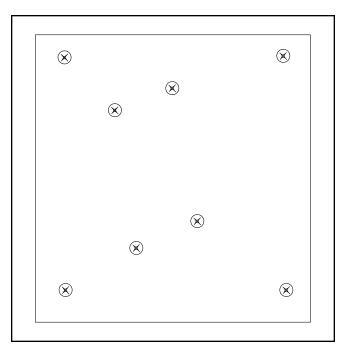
Control Board Mounting Screw Locations may vary with different Code Machines.
